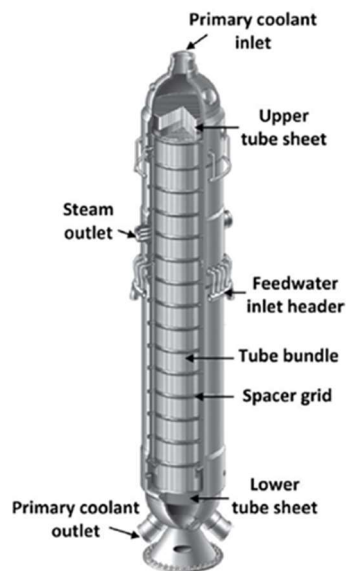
Cross section of the B&W OTSG tube and shell steam generator.
